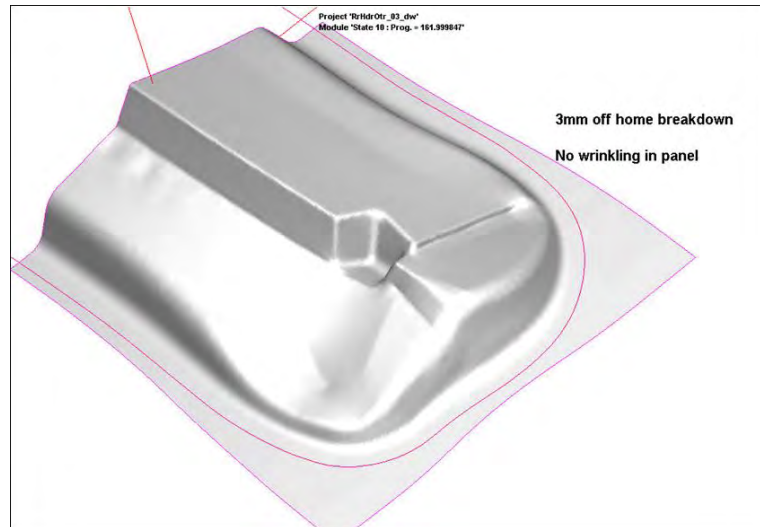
Rear Header Reinf - Tool 3mm from bottom
